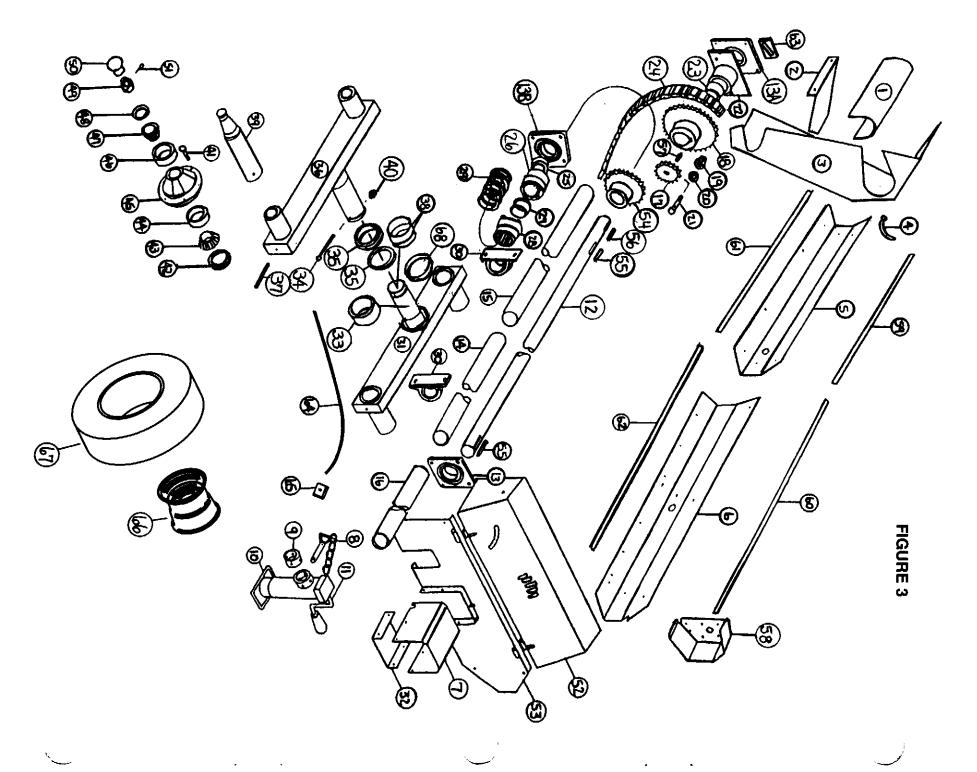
SHIELDS, SIDE SHAFT AND AXLE ASSEMBLIES
